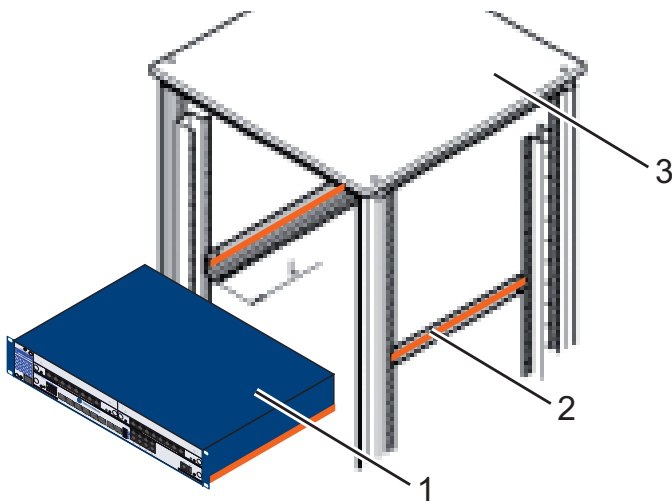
Assembly in a switch cabinet with sliding/mounting rails
